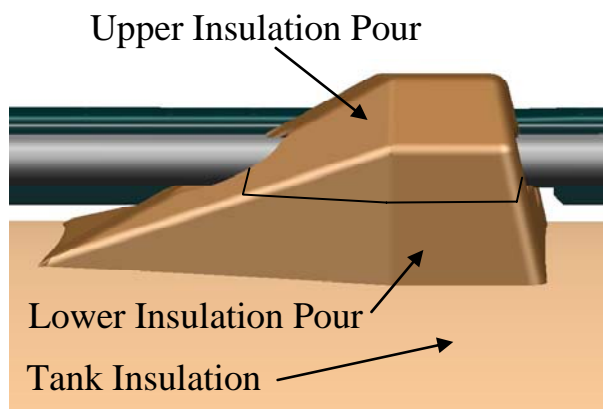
Side View of LH₂ IFR Showing Upper and Lower PDL 1034 Pours
